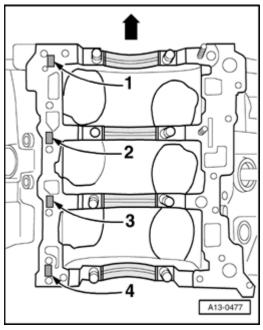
Application Of Crankshaft Bearing Shells For Cylinder Block Courtesy of VOLKSWAGEN UNITED STATES, INC.
